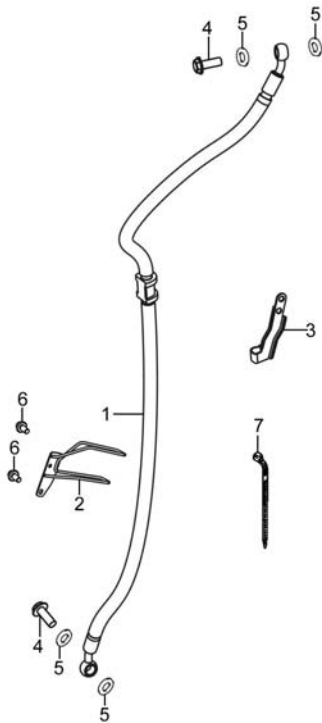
HOSE,FRONT BRAKE (P12-S435-0005)
